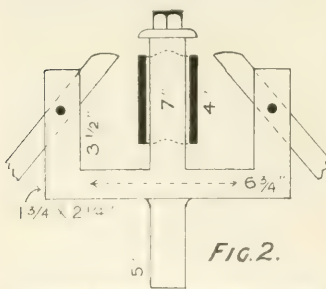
is a double cutting tool for rocker arm and link hanger ends. Various sizes of sleeves are used on the center post to conform with the different openings.
